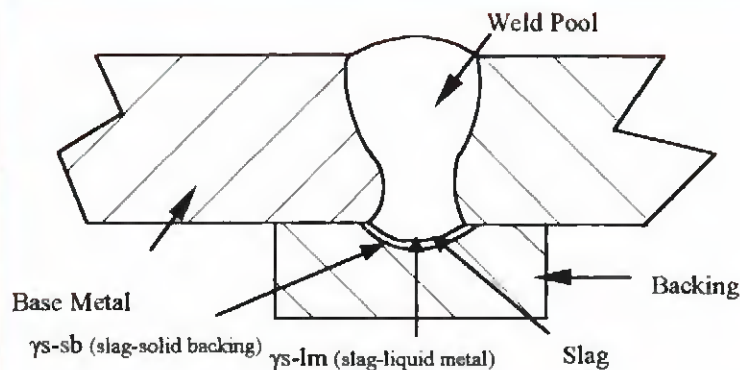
The working model of slag in TMFP arc welding.
